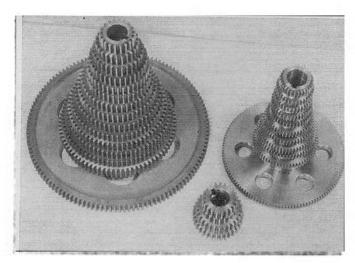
Set of Myford gears on left, set of gears of reduced d.p. on right. 127 wheels at base of each.
